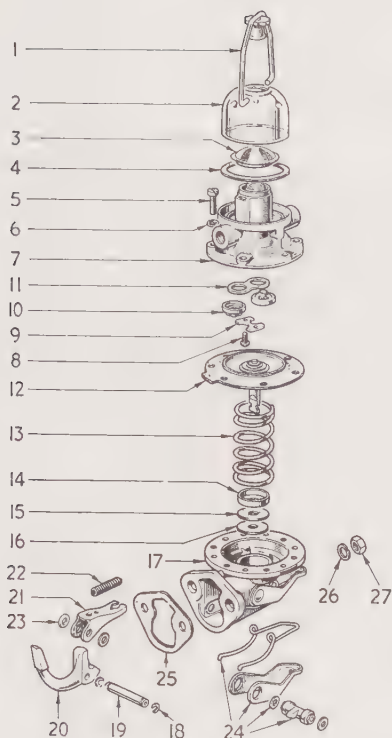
4 Components of fuel pump, larger type for 6-cylinder engines.
